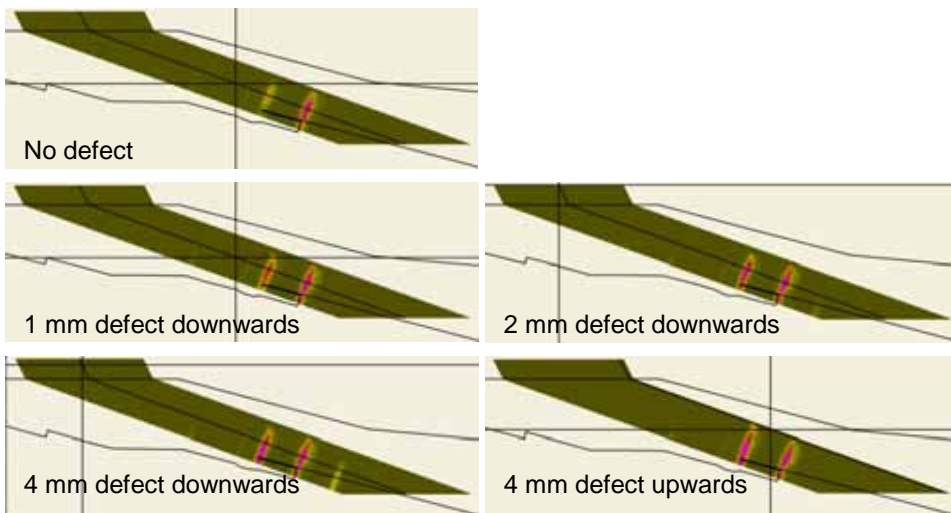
Indications computed with different defect sizes and positions in relation to the gap formed by the weld backing. B scans shown.
